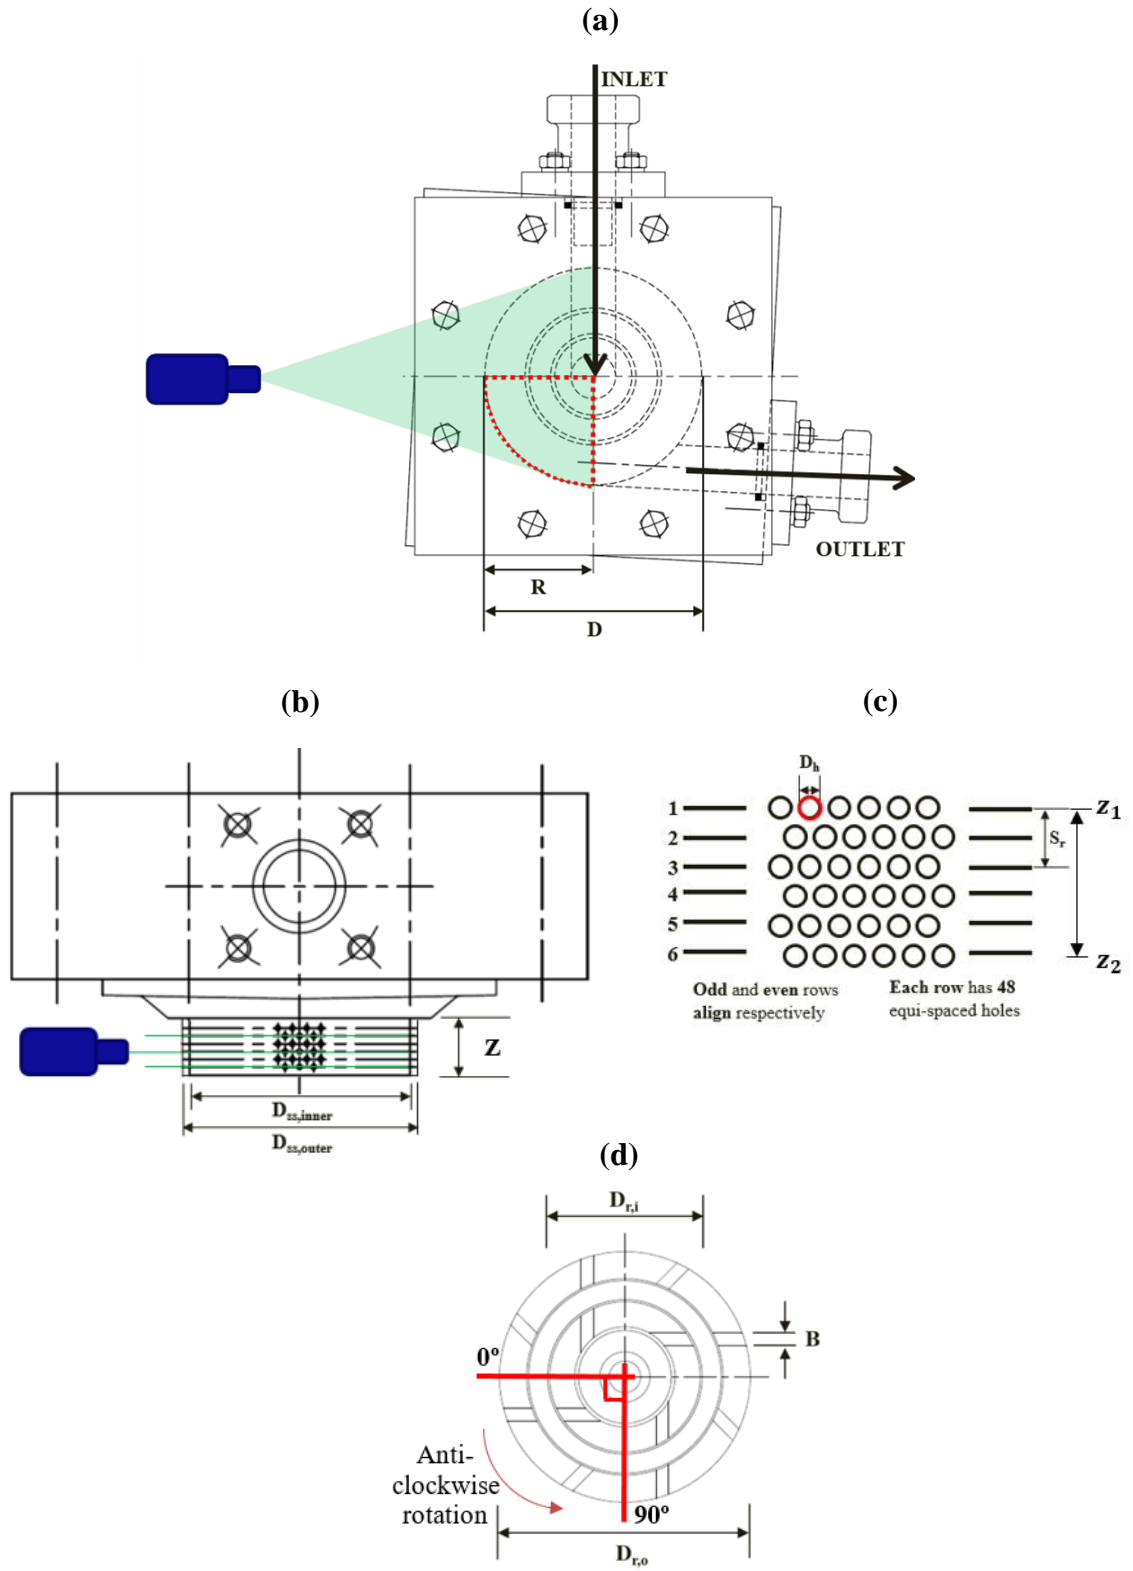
(a) Mixing head inlet, outlet, laser sheet and region of interest at the front view (b) Mixing head showing laser sheet positions from top view (c) Secondary stator details (d) Rotors schematic at 0° position
